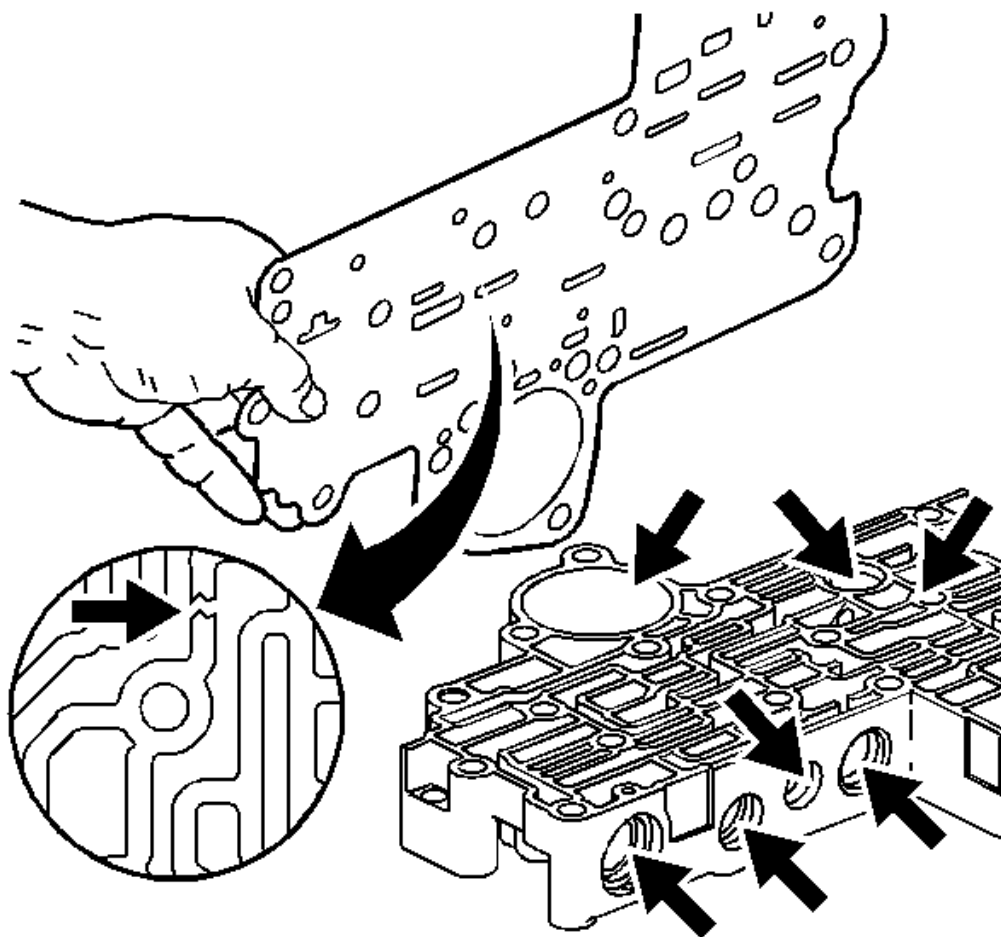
Identifying Upper Control Valve Body Gasket Damage
